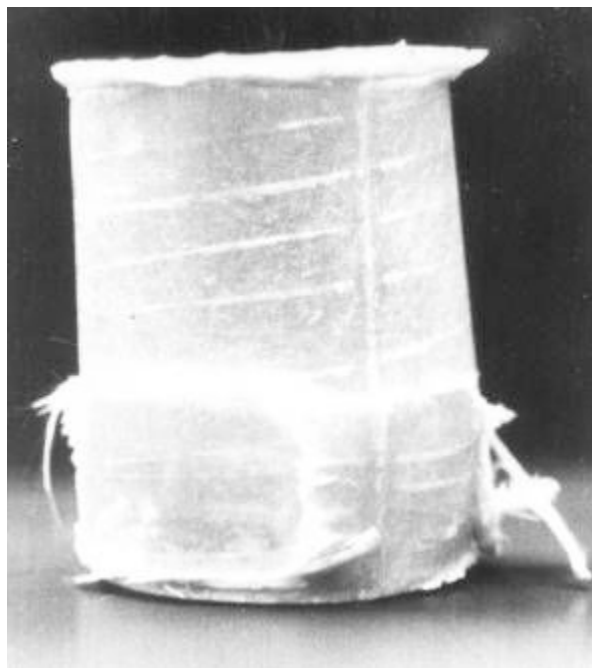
Macro photograph of an RJPR tube crushed at 70 °C showing the interpenetration mode.
